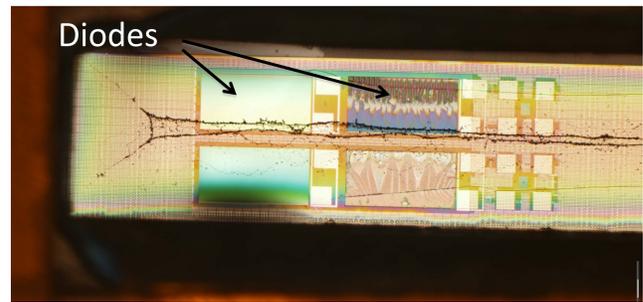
Photograph of the diodes after removal of the back substrate using the mechanical grinding/polishing process.
